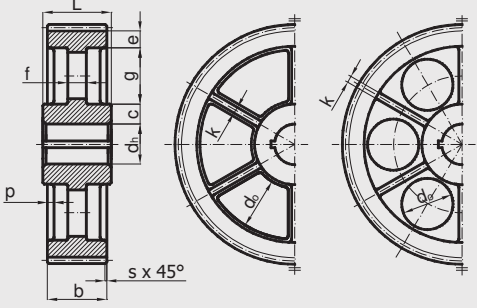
Welded gears of larger dimensions, a) - with plate and ribs, b) - with plates
